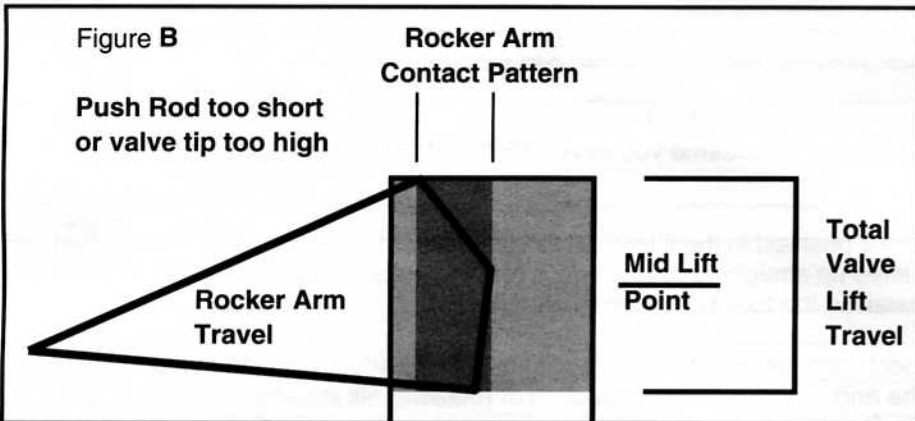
Figure B shows the relationship between the rocker arm tip and the valve stem tip when the push rod is too short or the valve tip is too high.
